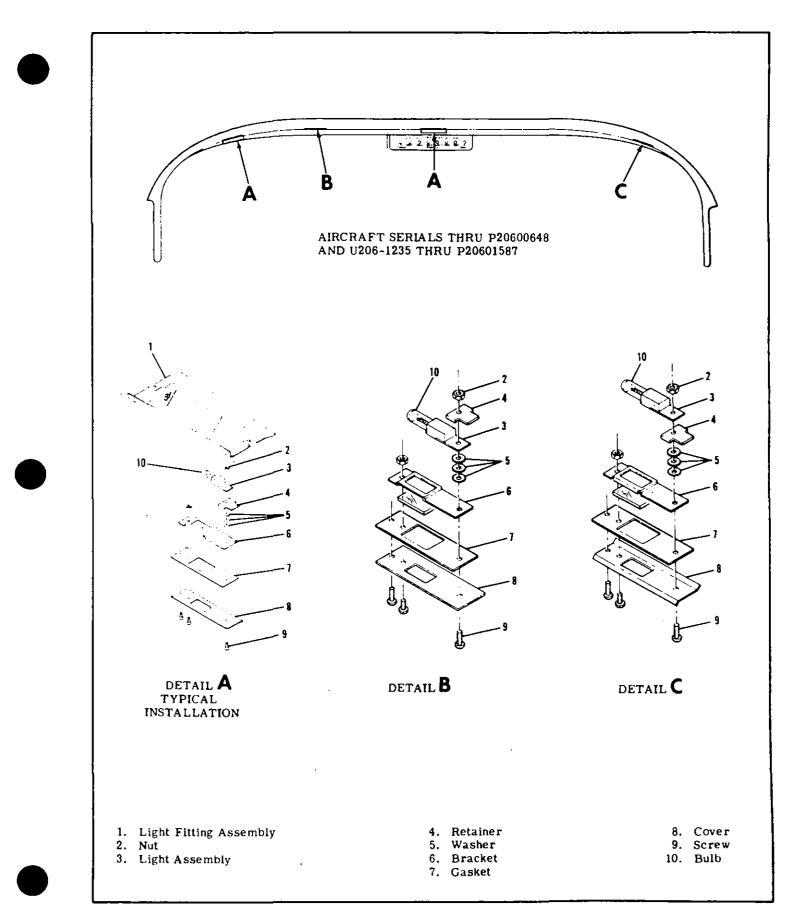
Instrument Panel Glare Shield Light Installation (Sheet 1 of 2)
